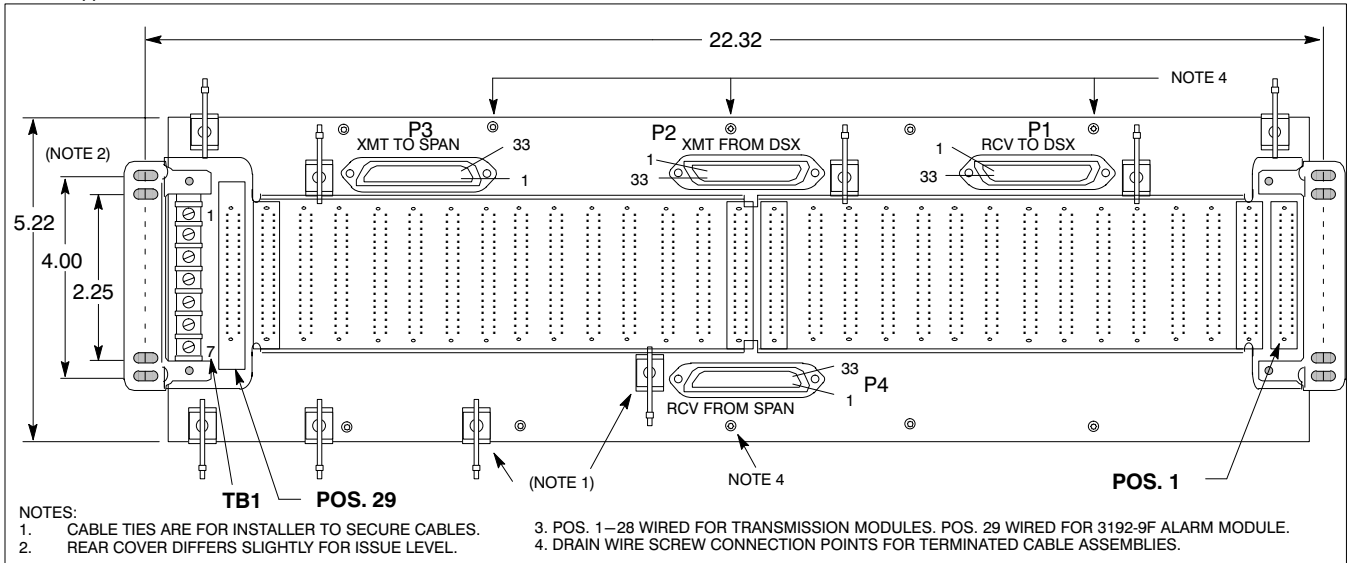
3192-11 STS Shelf Assembly, 23" Connectorized, Rear View
